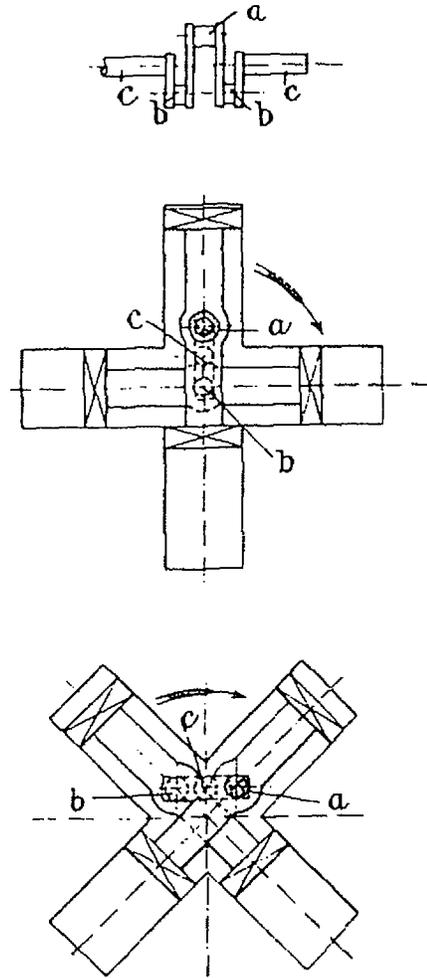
Rotary hypocycloid engine design by the Burlat brothers (P5).
